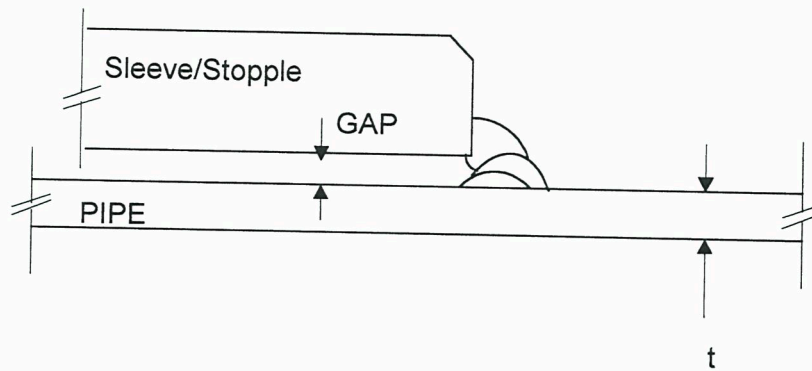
WELDING DETAIL AND SEQUENCE – TEMPER BEAD TECHNIQUE
